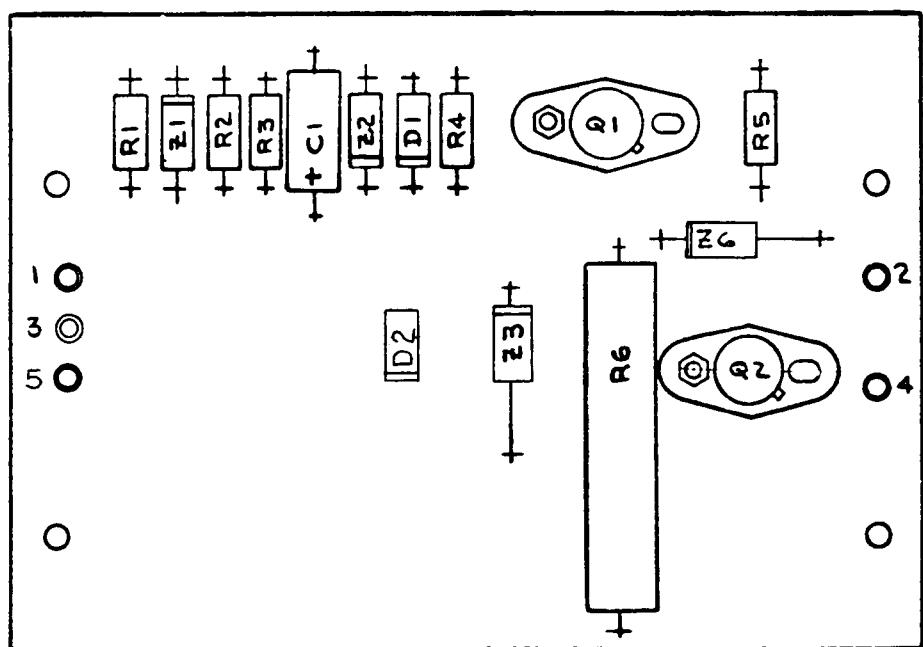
Component Location Single Input Buffer in FT-11 Case, 125 Vdc
